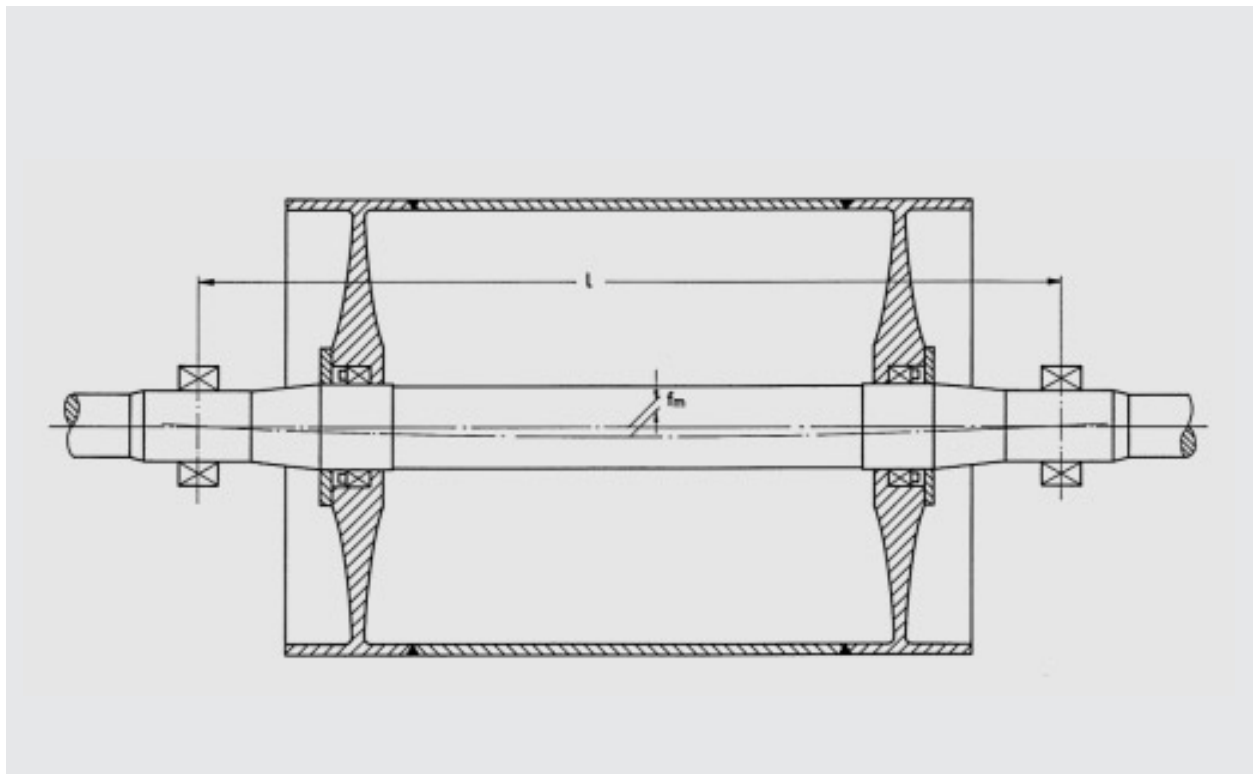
· Belt drum mounted with Locking Assemblies RfN 7012.
